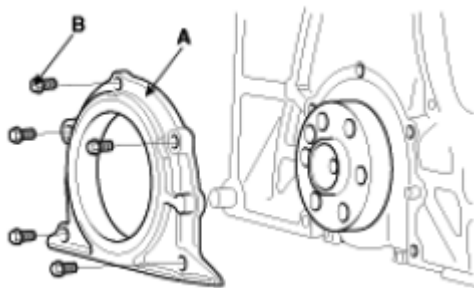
Identifying Rear Oil Seal Case With Bolts
